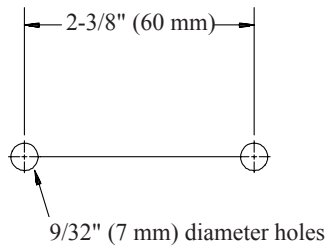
Glue Filter Mounting-Hole Dimensions
